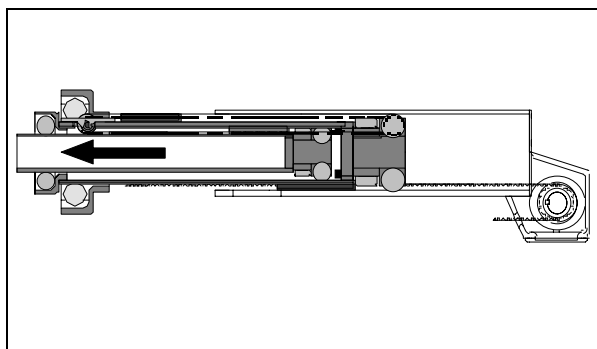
Remove toothed belt sealing piece and mechanical limit stop (Pos. No. for HTR80)
